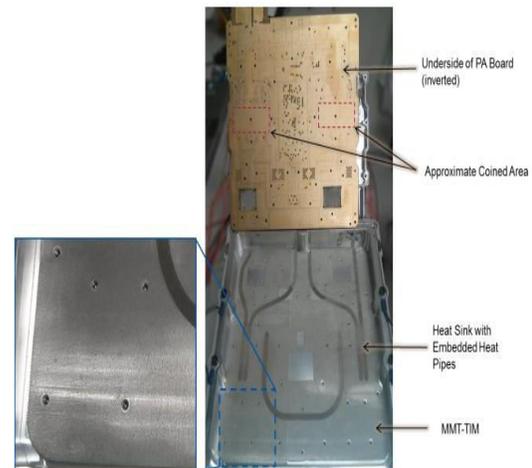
The heat sink showing embedded heat pipes and the underside of the PA board (inverted relative to the heat sink) with a close up of the MMT-TIM prior to installation
